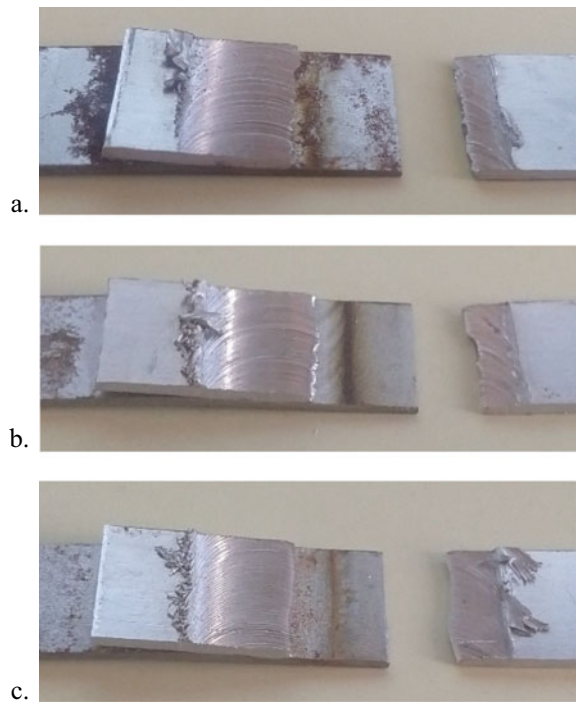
Fractured lap shear test specimens: a 98, b 146, c 206
